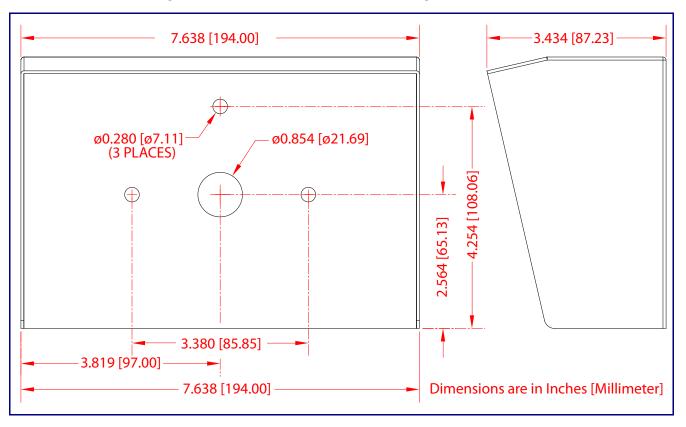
Shroud Dimensions and Mounting Hole Locations
